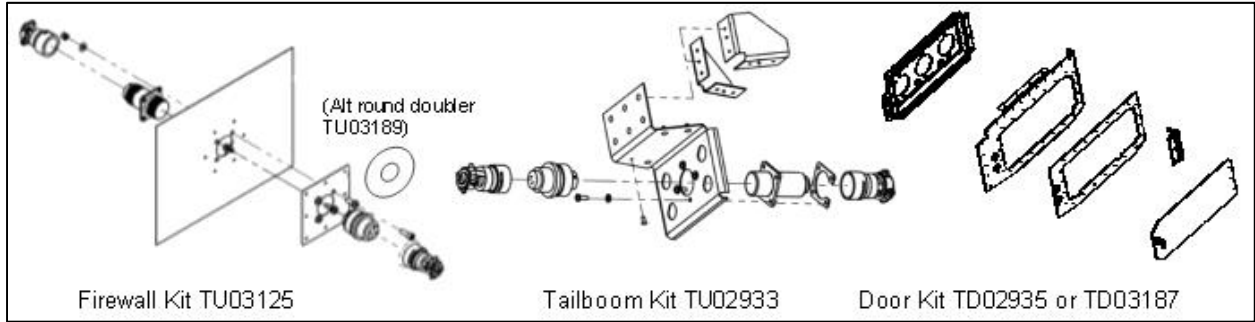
Above kits requires sheet metal work; hardware and consumables supplied by installer. Refer to § 3.1 and 5.5 for alternate connector and door kits.
